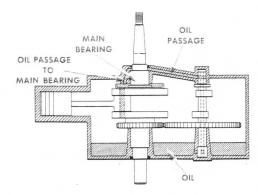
Oil runs down through holes and into the main bearings. (Kohler)
